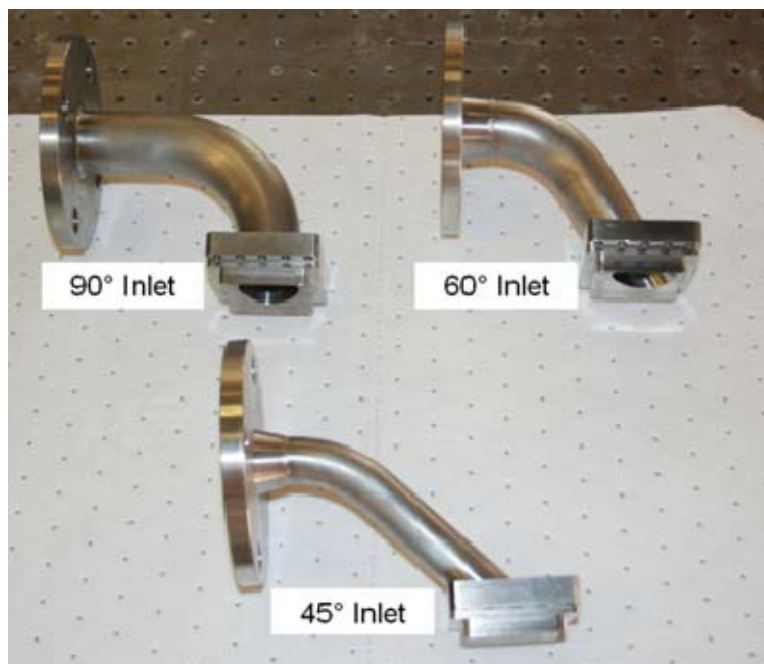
90, 60, 45 Degree Inlet Assemblies
